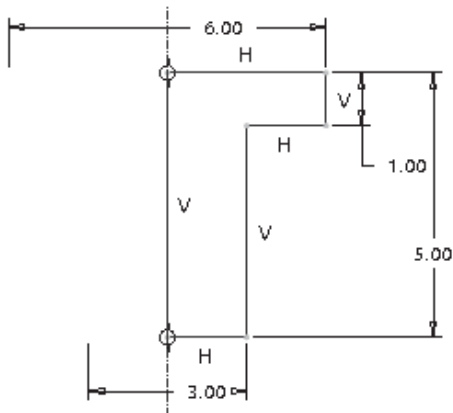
Sketch with dimensions and constraints for the counterbore hole
